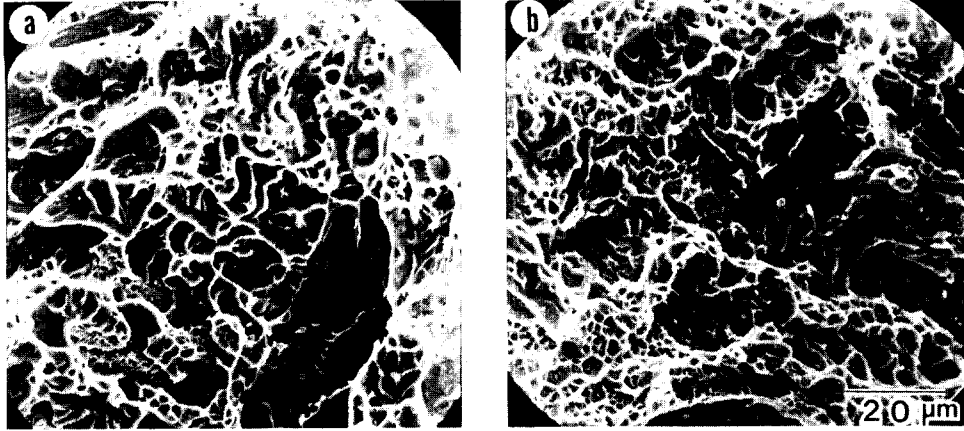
SEM fractographs of GMAW impact specimens having their notches at weld metal tested at -70°C (a), -90°C (b)
